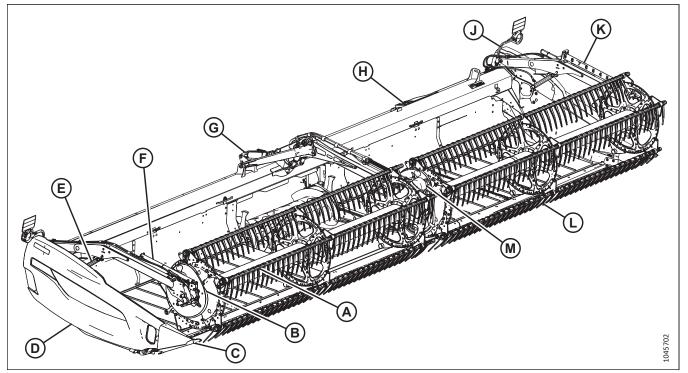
D2 Series Draper Header – Double Reel Shown
